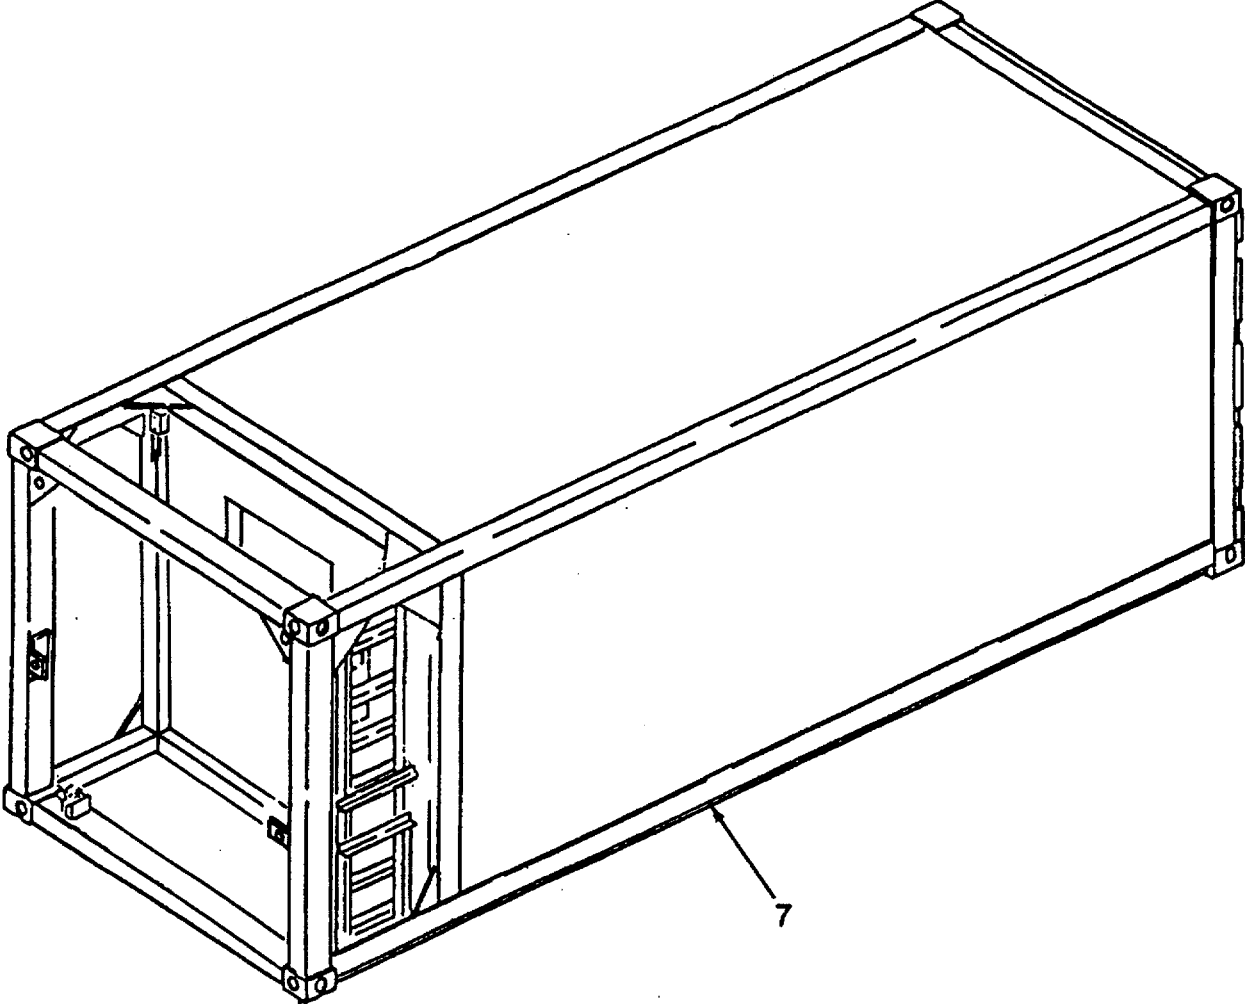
Braces and Container Frame(Sheet 2 of 2)
